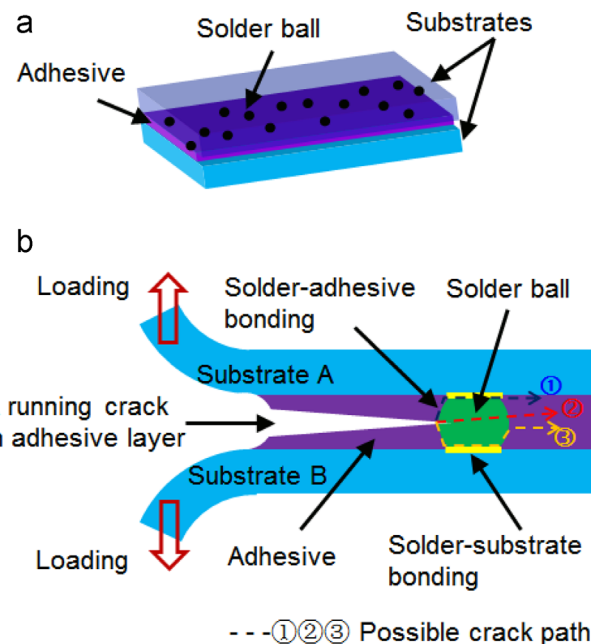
Schematic of the solder-reinforced adhesive bonding method. (a) Solder balls immersed in the adhesive layer. (b) Theoretical representation of three possible crack propagation paths: solder/substrate interface, through solder ball, and solder/adhesive interface.
